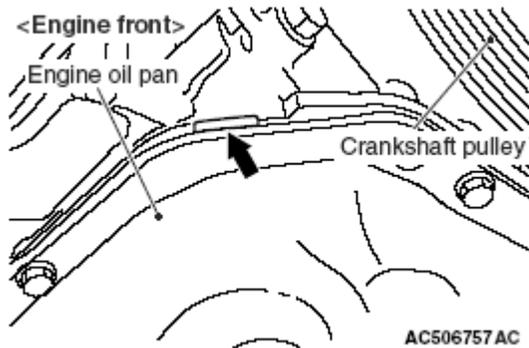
Identifying Engine Oil Pan And Crankshaft Pulley
